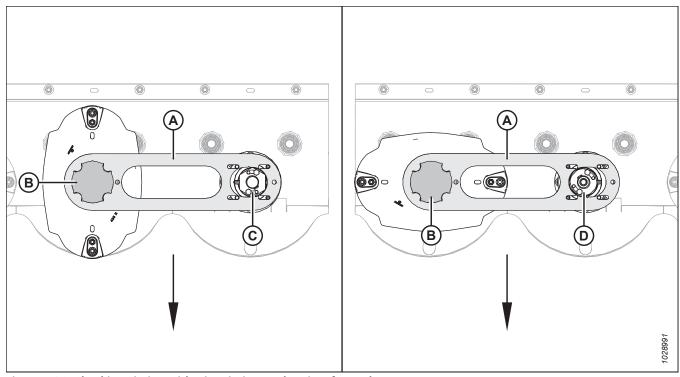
Checking Timing with Disc Timing Tool - View from Above
